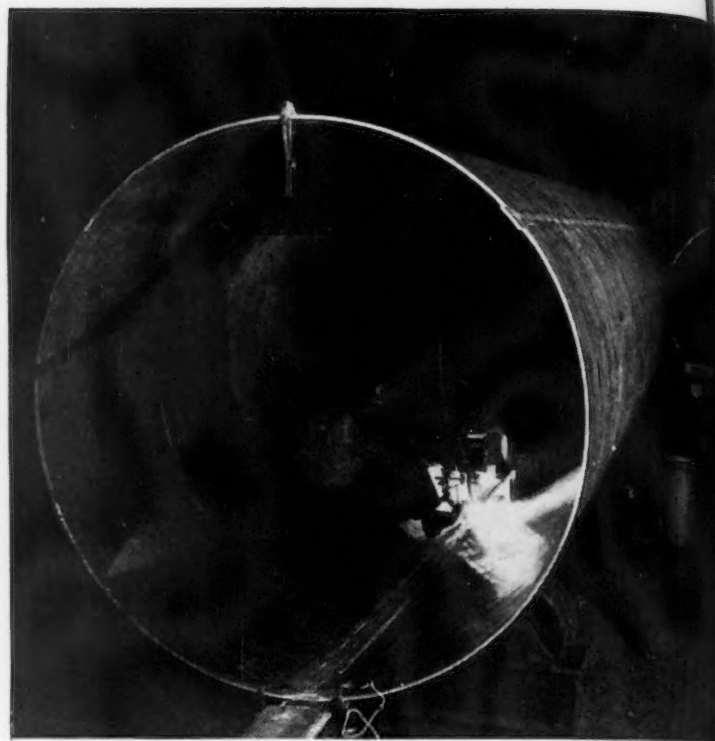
Automatic carbon arc welding of all-aluminum tank car. Copper back-up bar 3-in. wide, $\frac{1}{2}$ -in. thick, with $\frac{1}{2}$ -in. groove is held against the outside of the joint. A tab is tacked to each end of the joint for starting the automatic arc bead.
